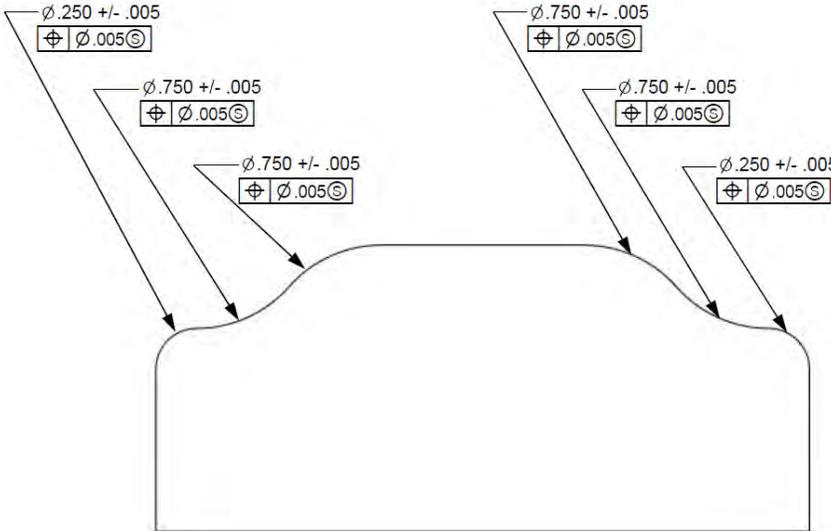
Design Requirements Specified Using Linear & Position Tolerancing
